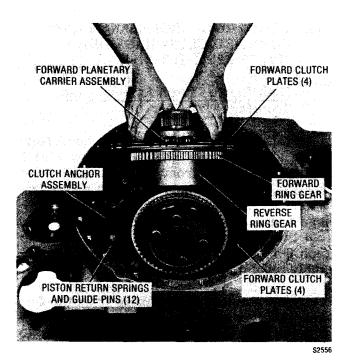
Removing forward planetary carrier assembly (TT, TTB 2221-1, 2421-1)
